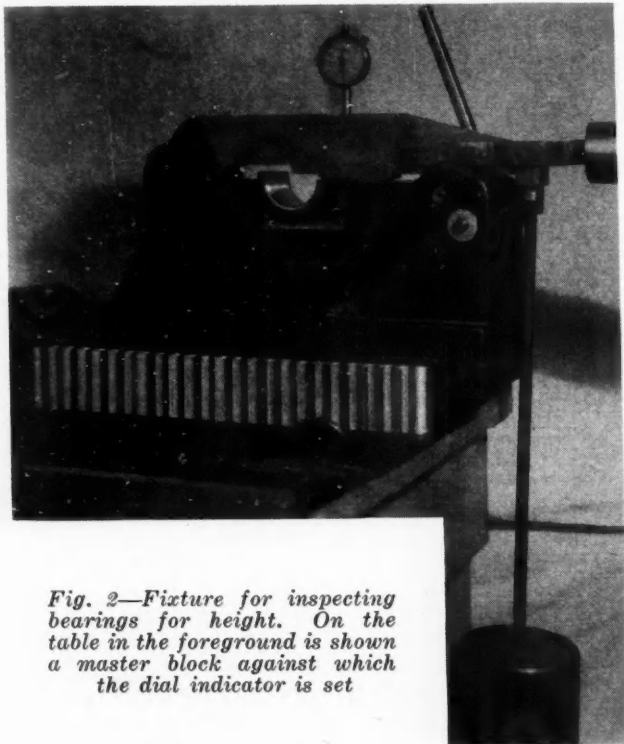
Fixture for inspecting bearings for height. On the table in the foreground is shown a master block against which the dial indicator is set
